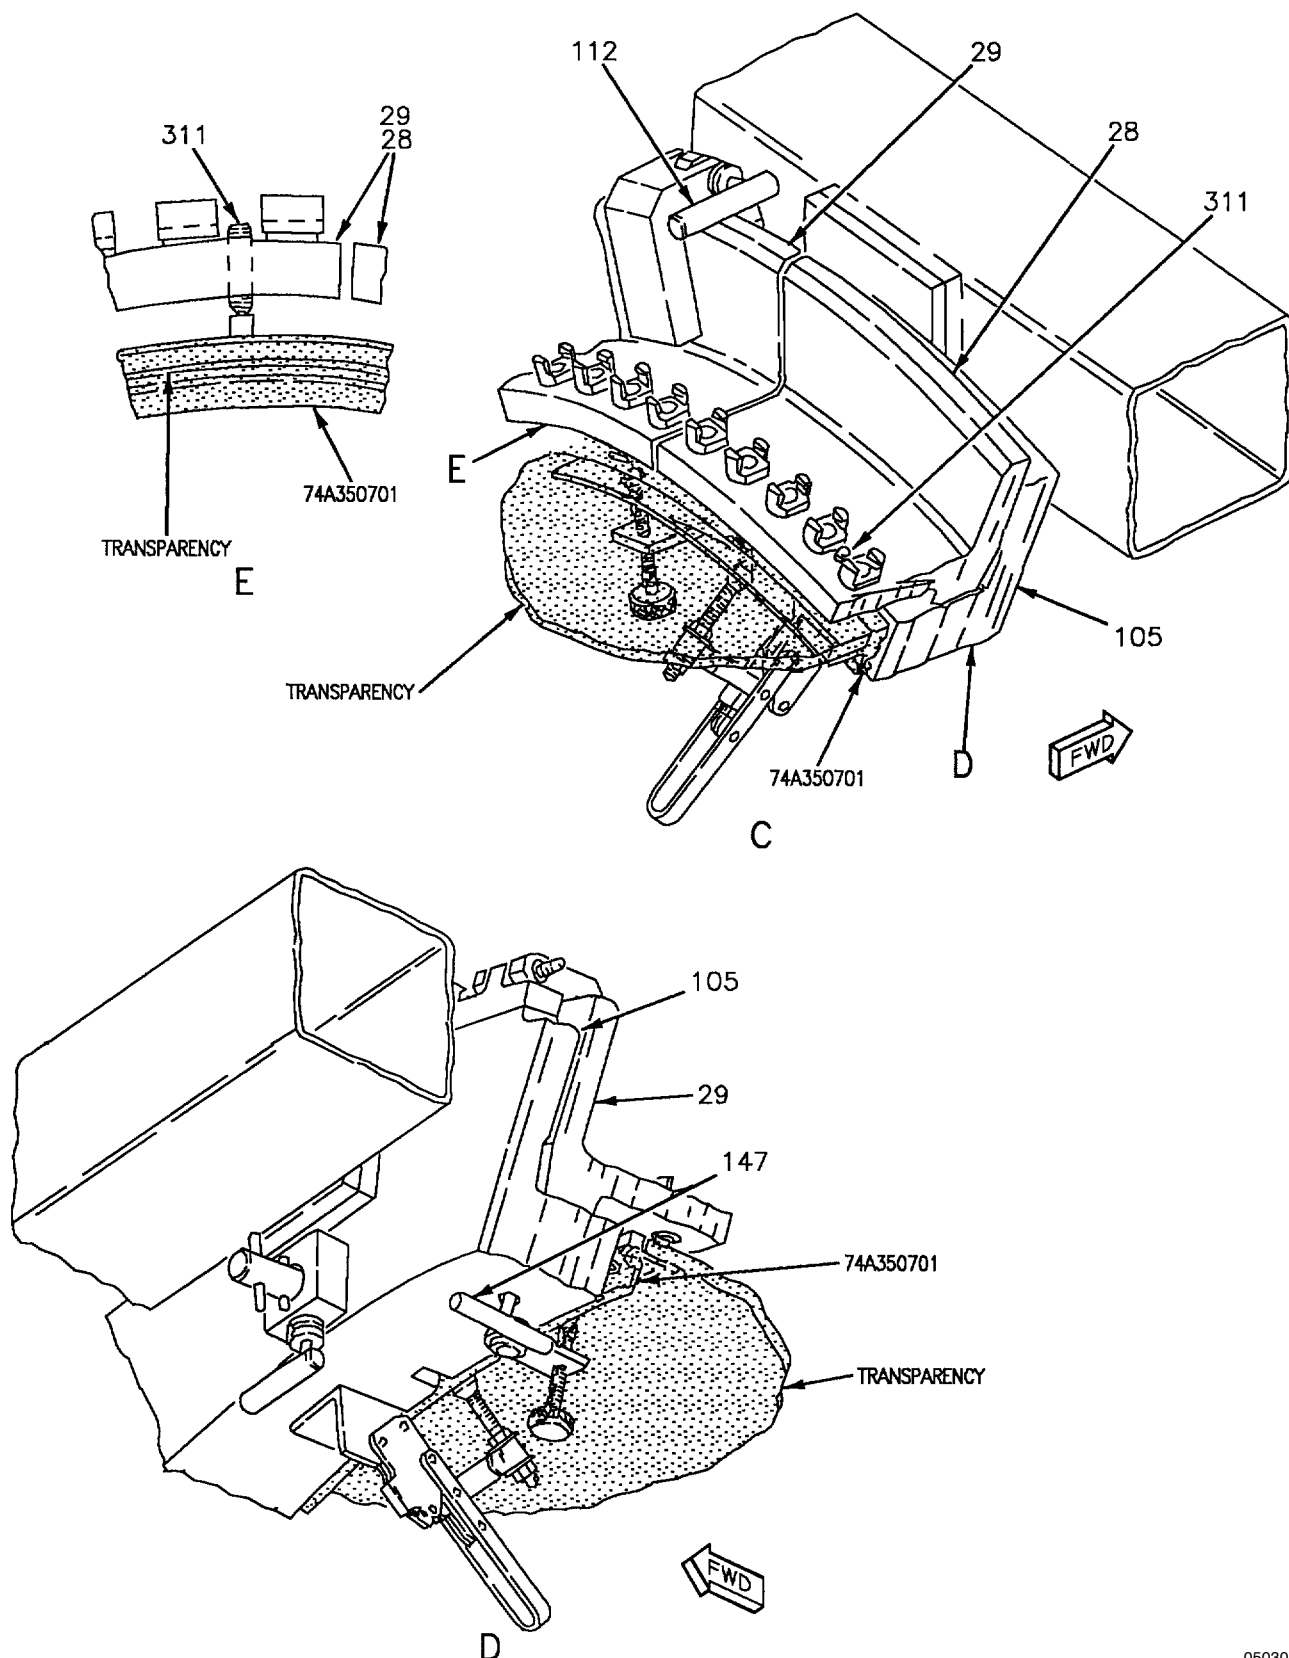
Drilling New Transparency and Structure (Sheet 3)
